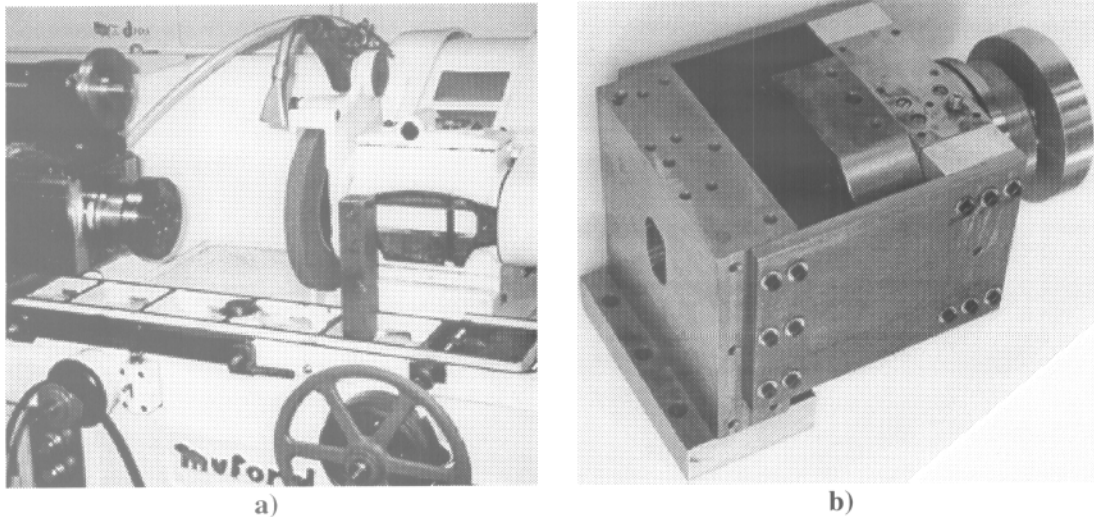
a) Cylindrical grinding testbed, b) single degree of freedom workhead flexure.
